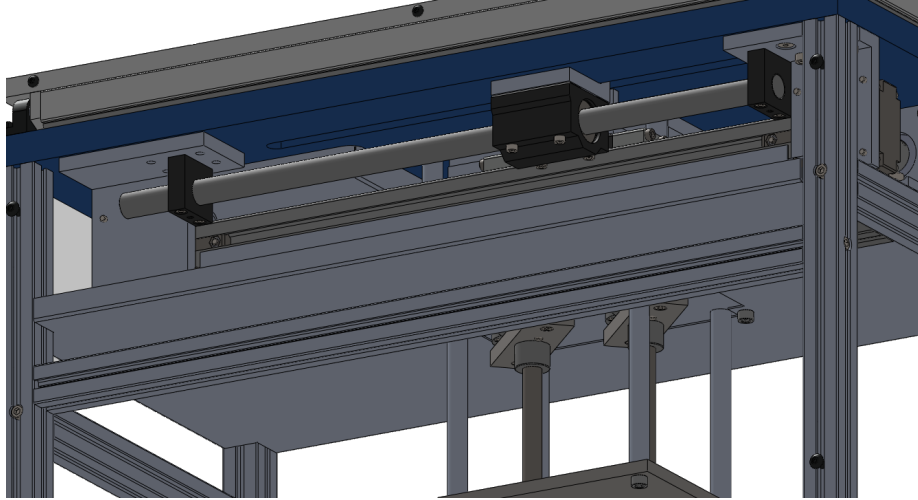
Schematic showing the change in the x-axis guide-rod and bushing block mounting, with components now mounted directly to the top surface plate
